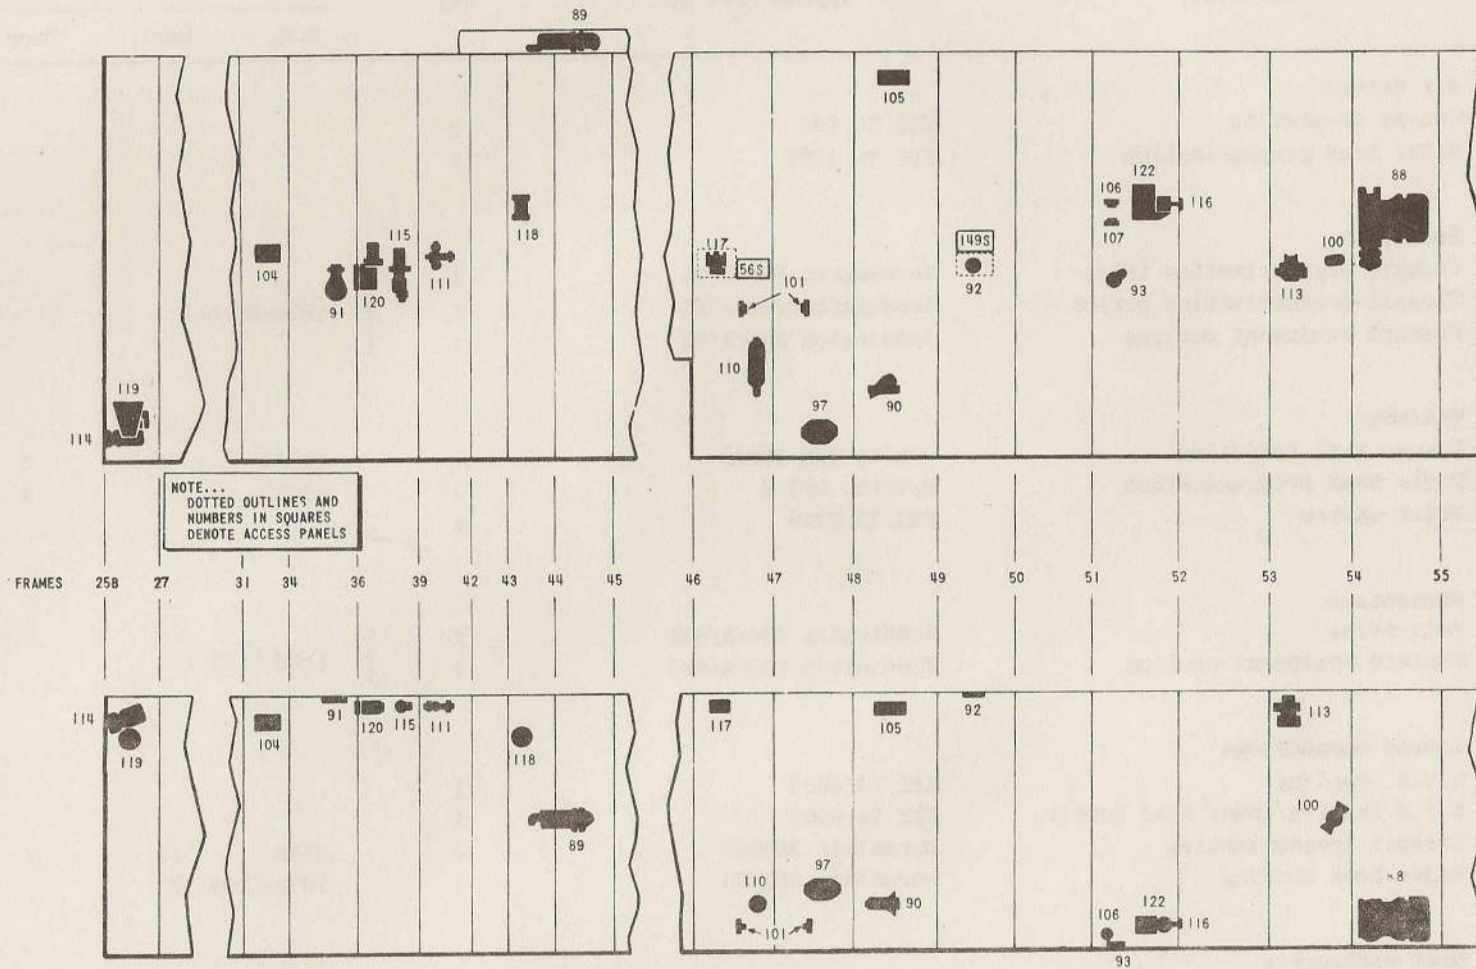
LOCATION OF MAJOR COMPONENTS—FRAMES 25B-57
